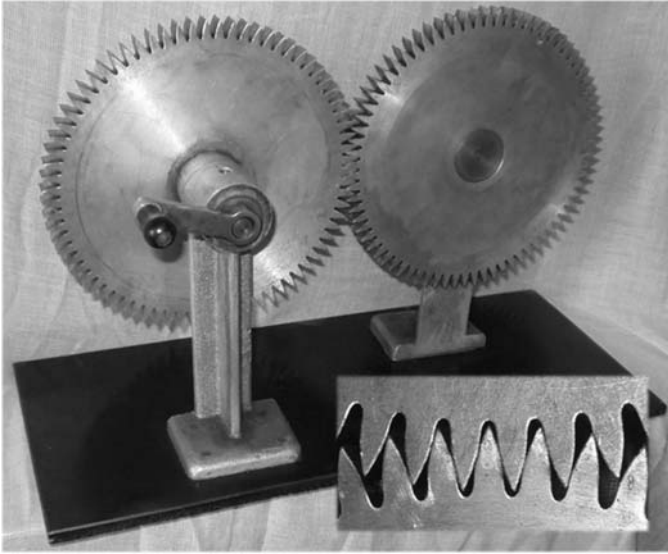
Cylindrical involutes straight toothed gearing with a contact ratio of more than four
